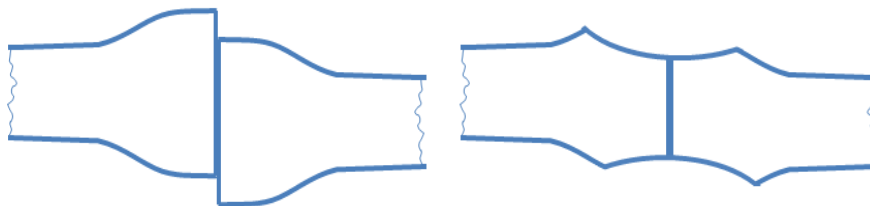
A mismatch of materials before welding is avoided with weld preparations. To the left are both joining materials of a higher thickness, which to the right are machined to a flush match.
